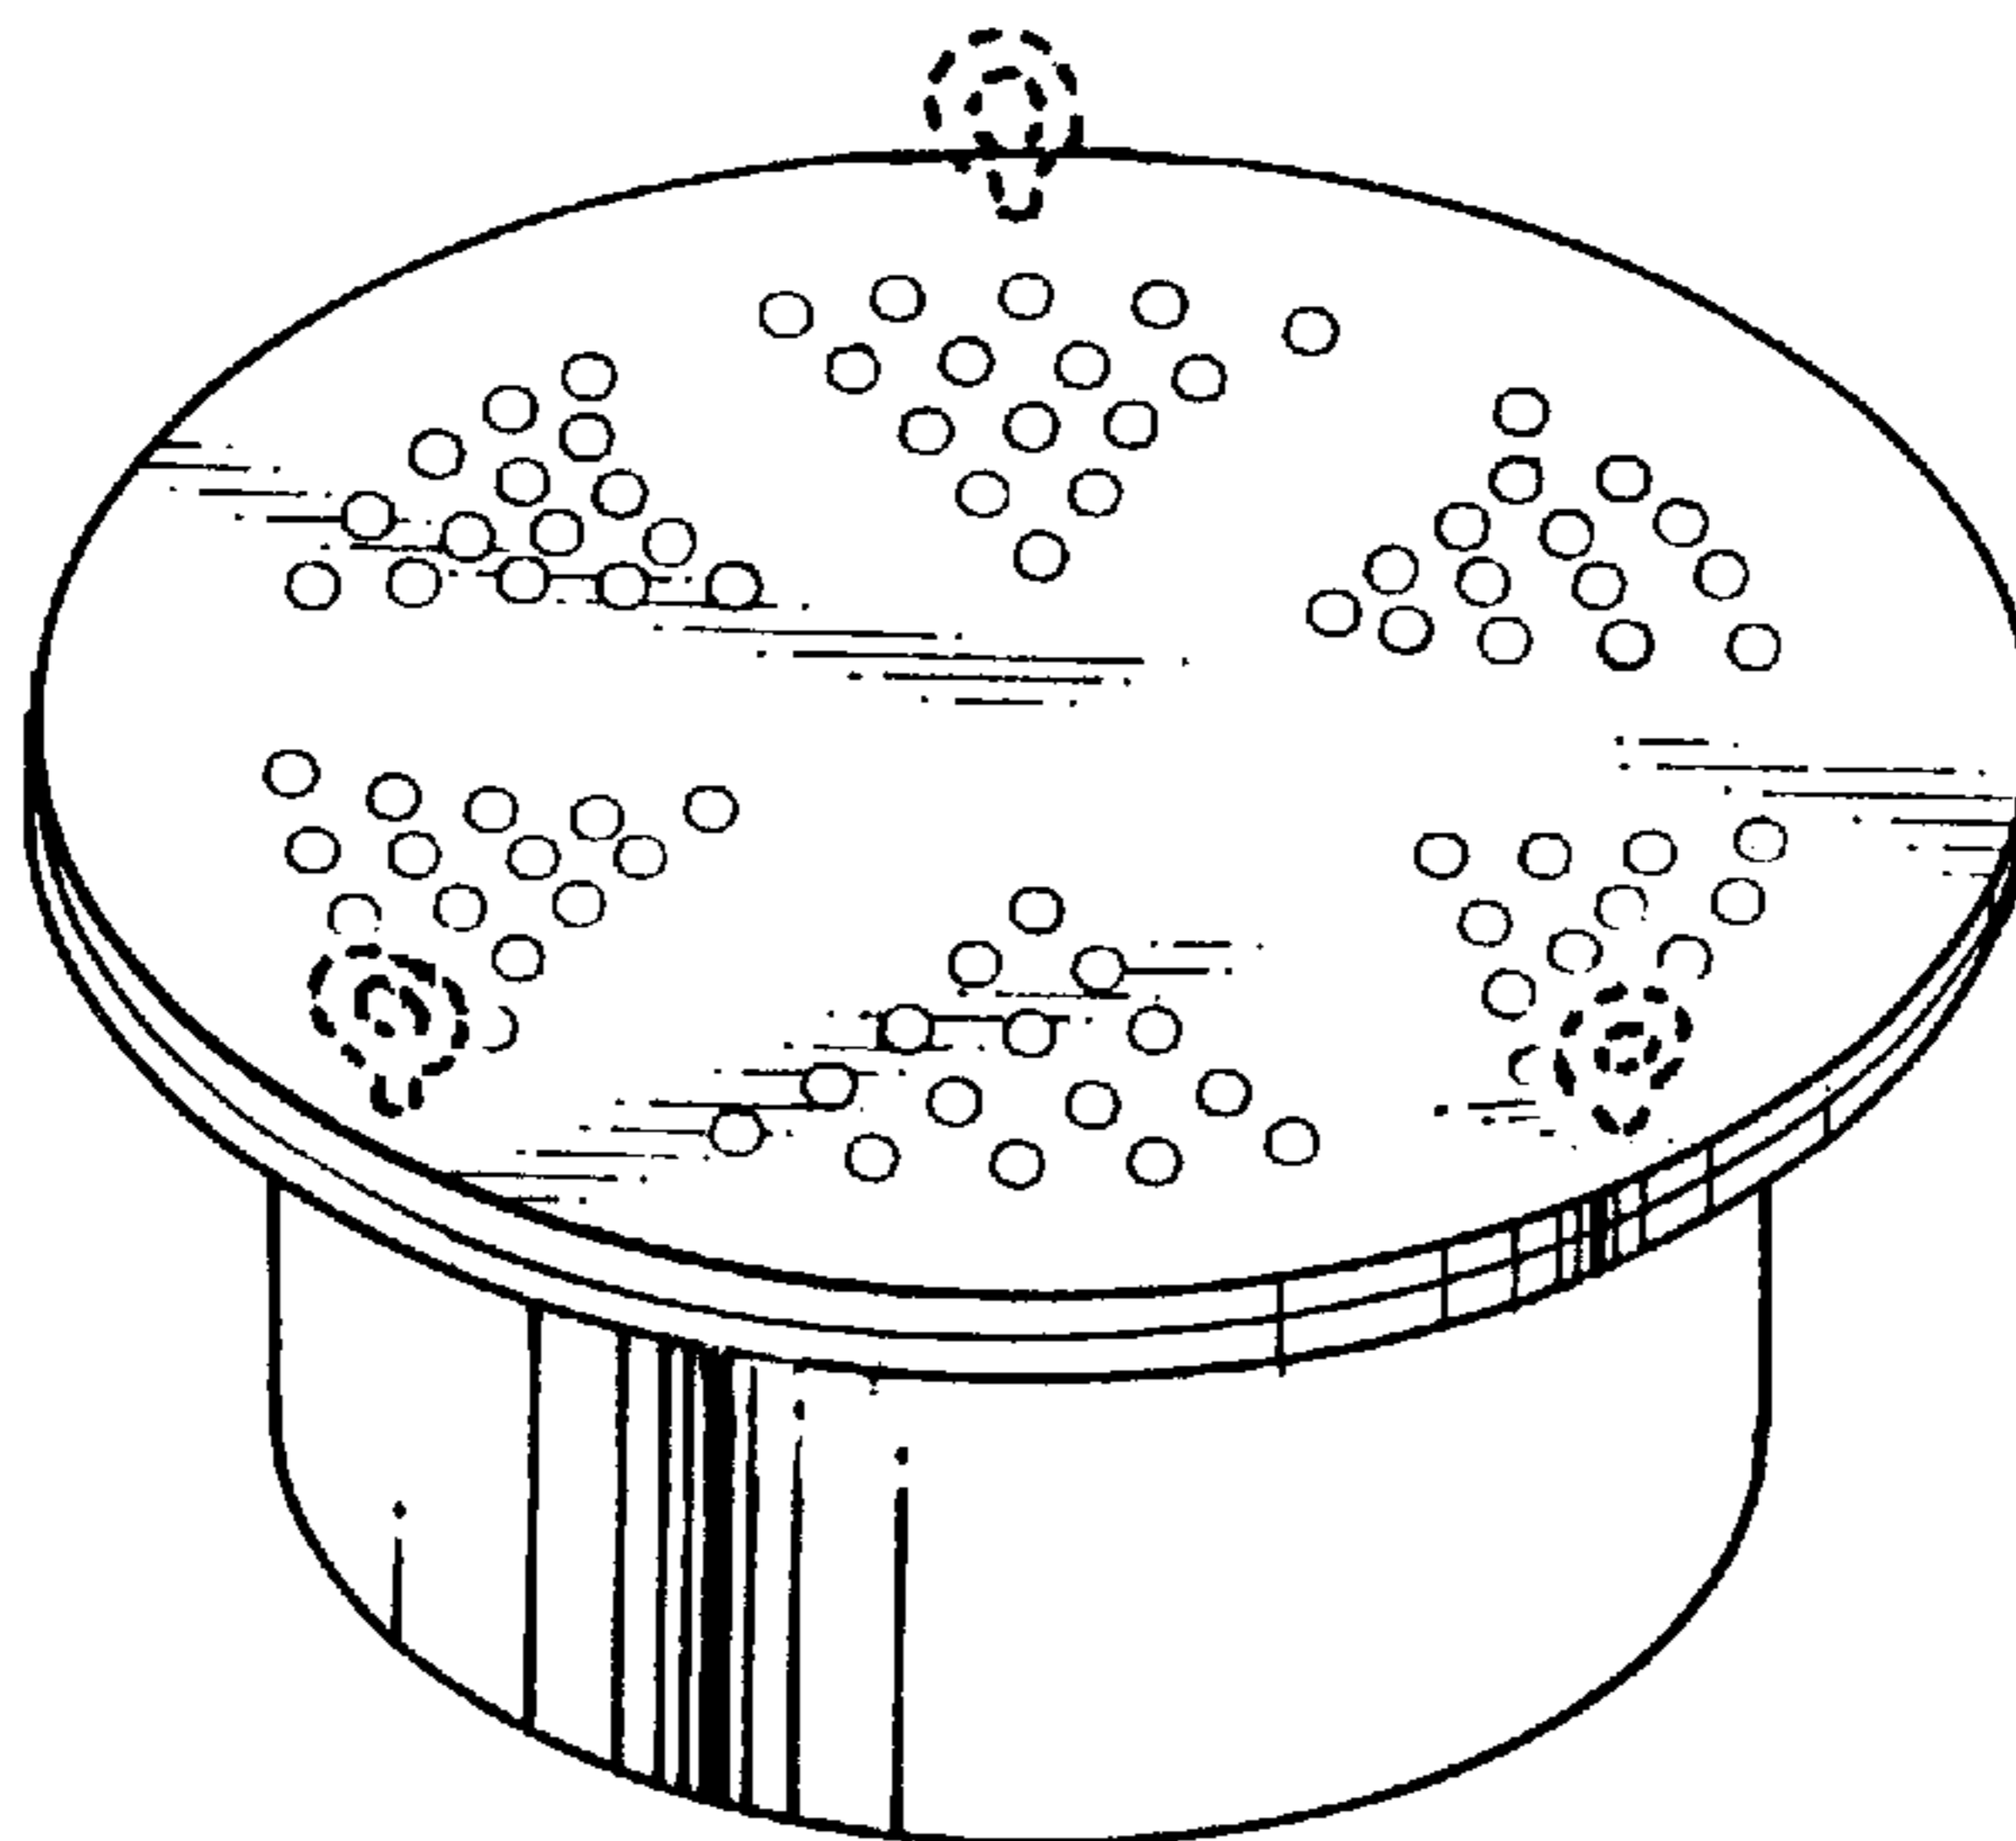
is a top perspective view of a disc-shaped container which can hold sorbent material showing our new design;
